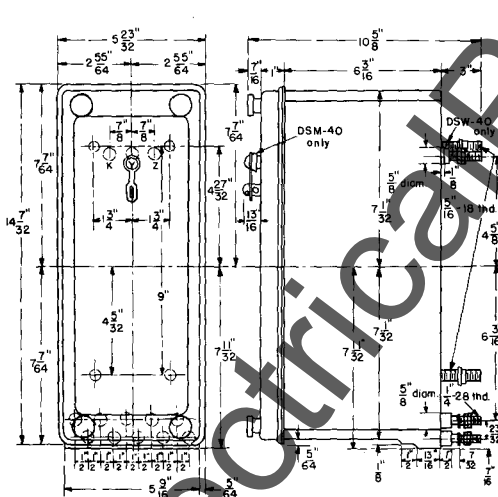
Dimensions for Types DS-40, DSW-40, and DSM-40
